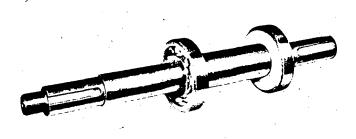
Mounted grooved ball bearings Mounting the shaft (210) in the bearing bracket (330) takes place in the opposite direction to dismantling (fig. 26).
